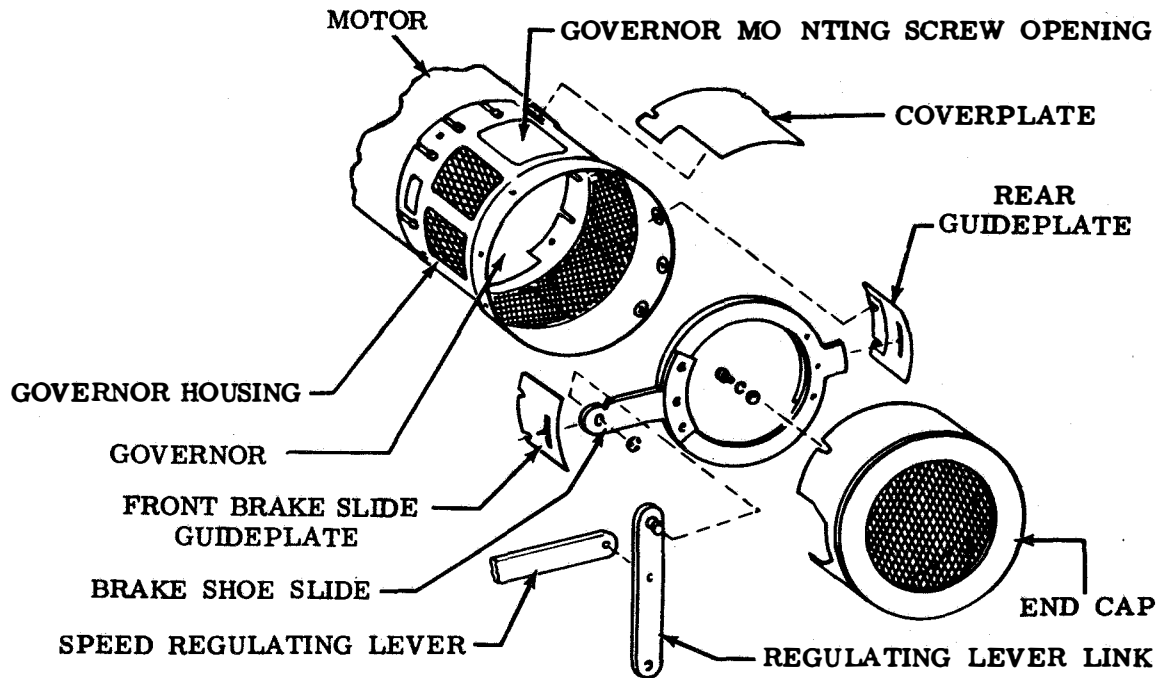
Access Instructions to Lubricate Gear Train and Governor, End View
